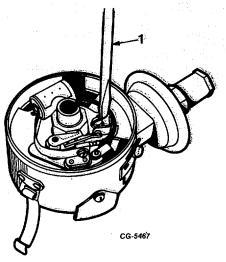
Adjusting Contact Point Gap 1. Screwdriver
